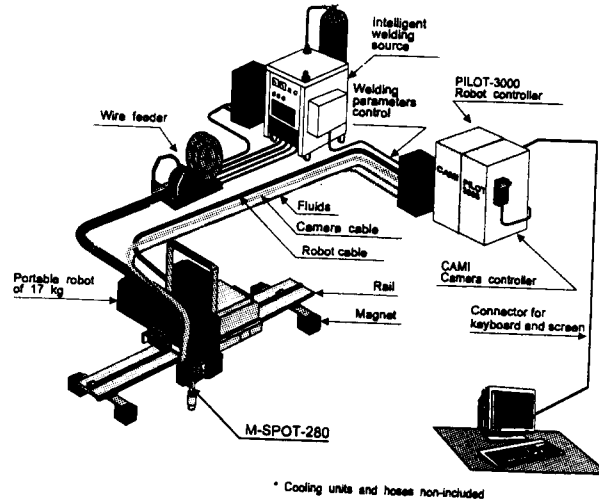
Portable Multipass Welding Robot Guided by Laser-Vision
